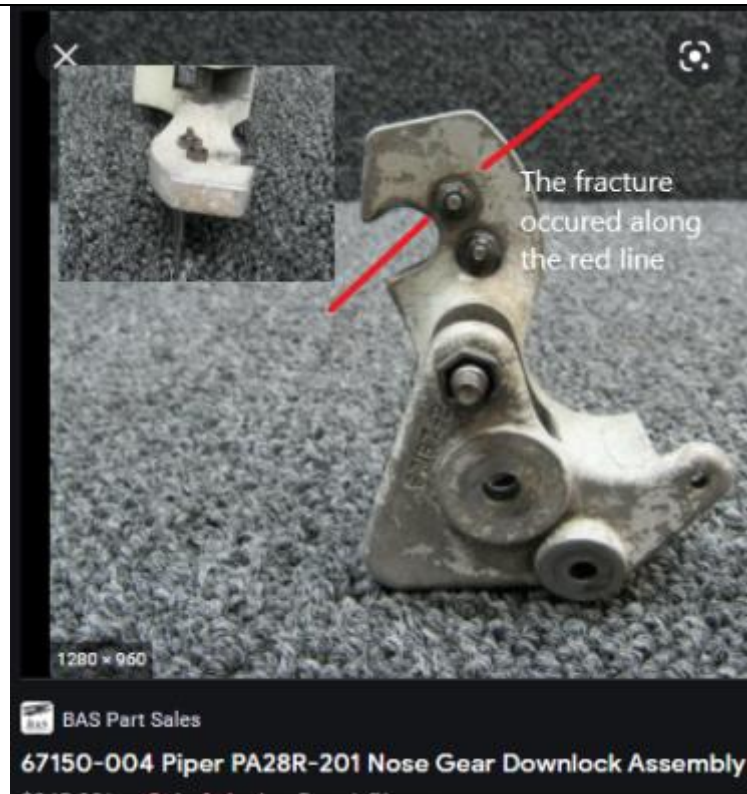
The downlock assembly. Inset shows thickness. (Source: <https://cdn11.bigcommerce.com/s-lh7wonygtd/images/>)
